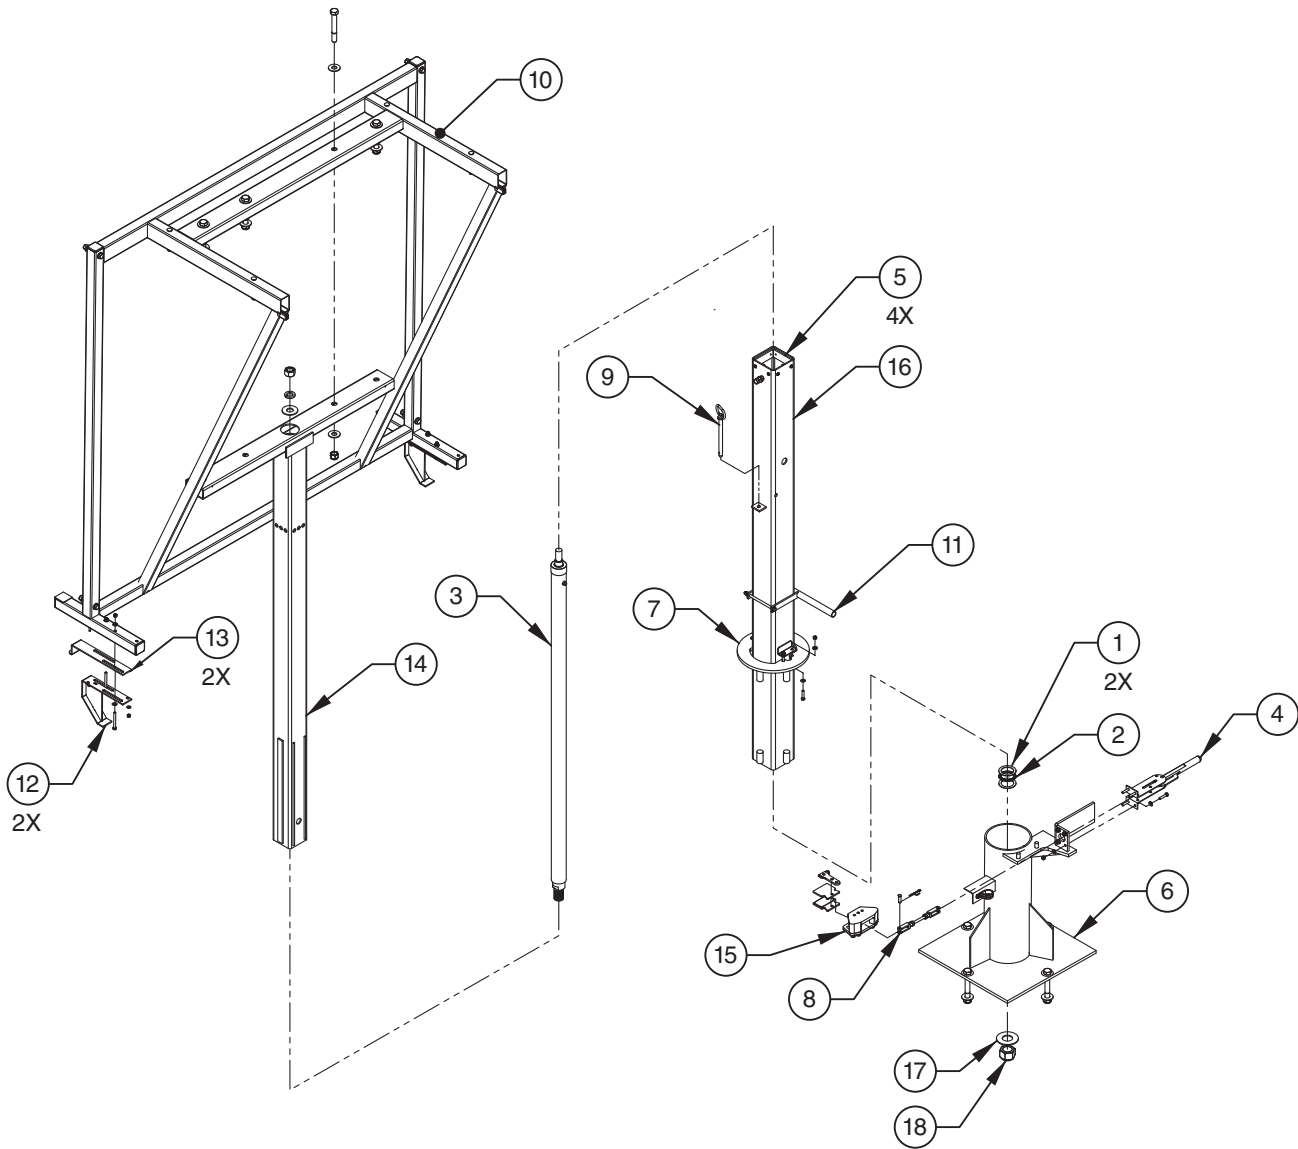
Parts drawing: Full-size trailer assembly
